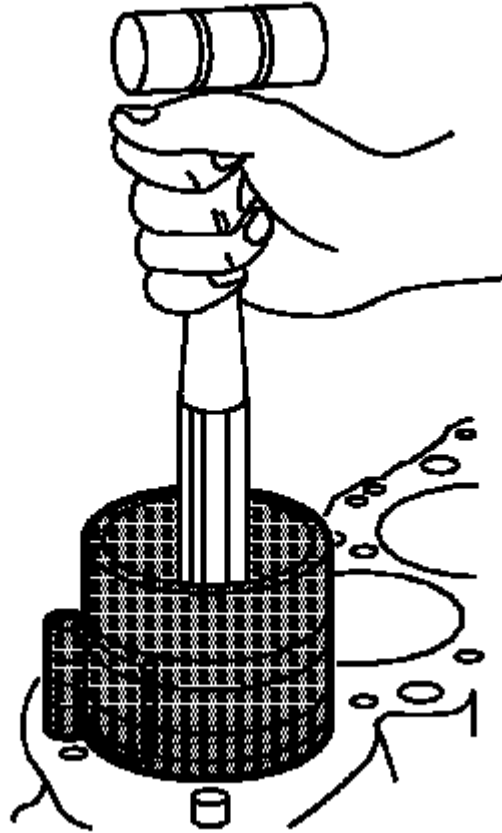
Tapping Top Of Piston With Wooden Hammer Handle
